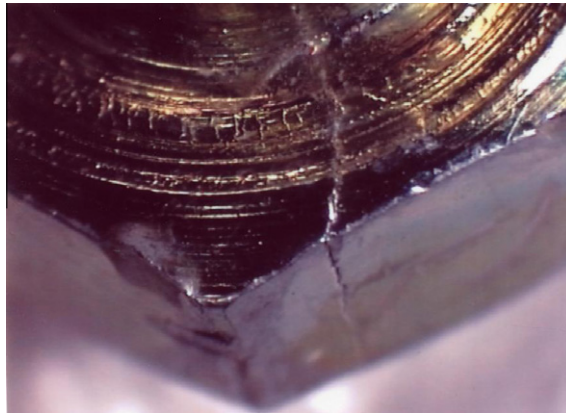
Pre-existing forging lap in the head of the carburettor bolt.
